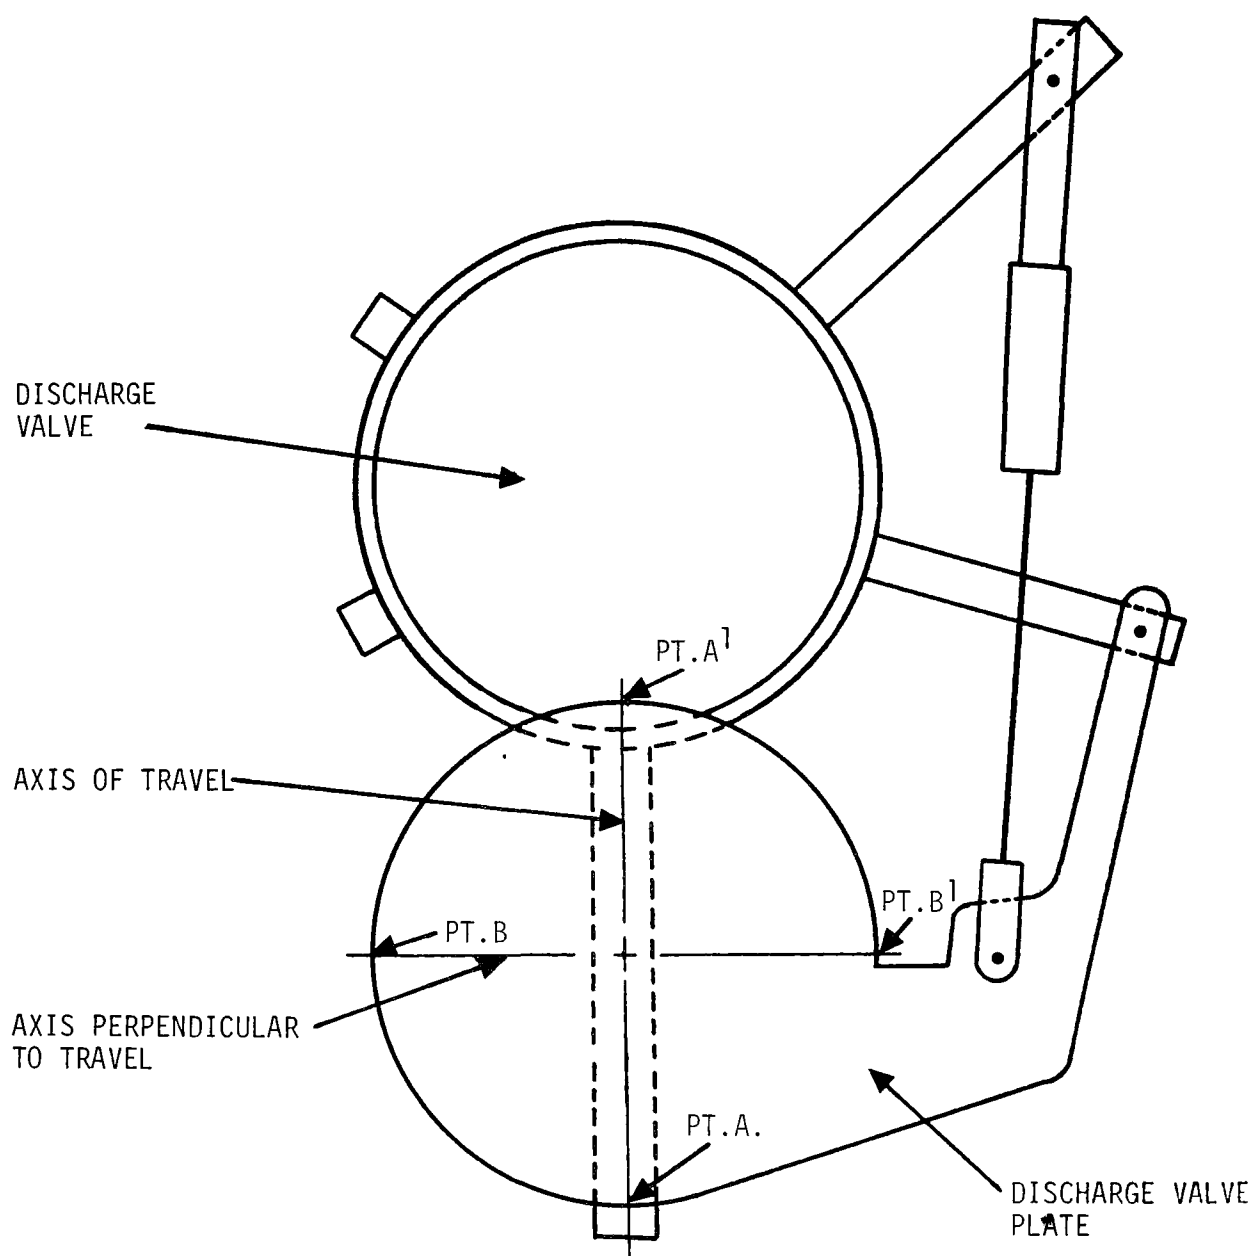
Top view of typical discharge valve showing the locations of the axes used in determining the thickness of the discharge valve plates.
